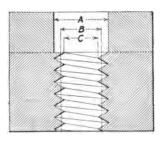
A is body size; C is root diameter; B is tap drill size that will leave enough stock for about two-thirds of a full thread as shown.
